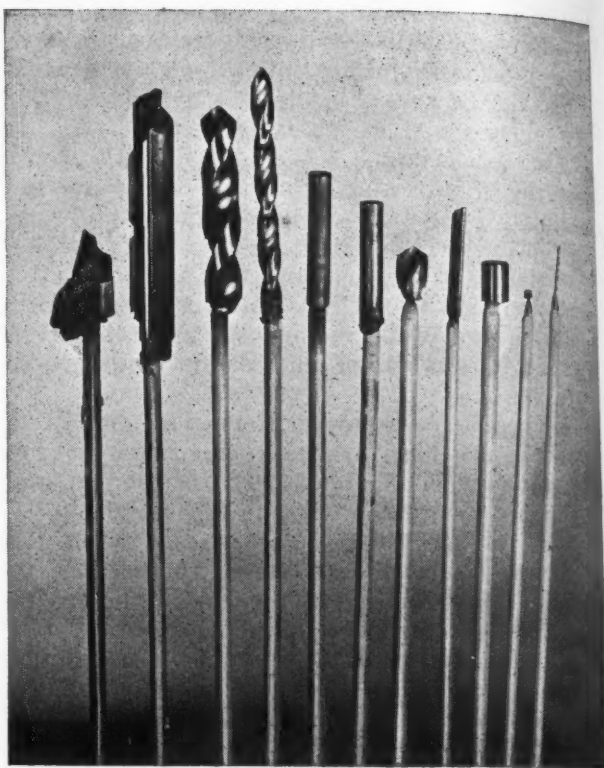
Drills, Reamers, and Pilots that have been Removed by the Welding Method
